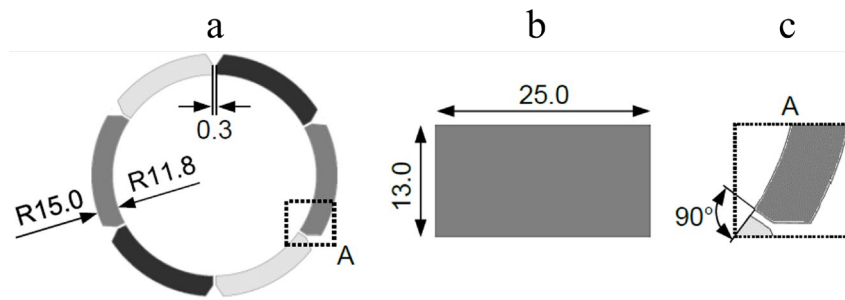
Cross-sectional view of a rotary drive with three terminal pairs (a), top view of a single rotor magnet (b) and detailed cross-sectional view (c); dimensions in mm [6]
